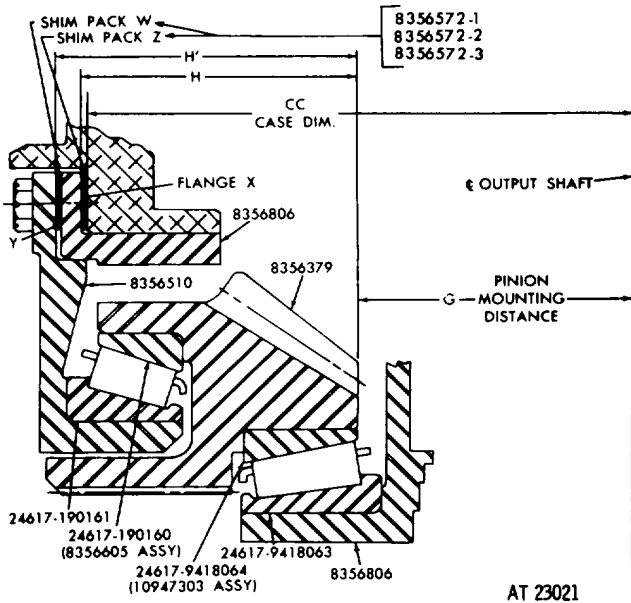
Nominal shims for bevel drive gear support and carrier.
